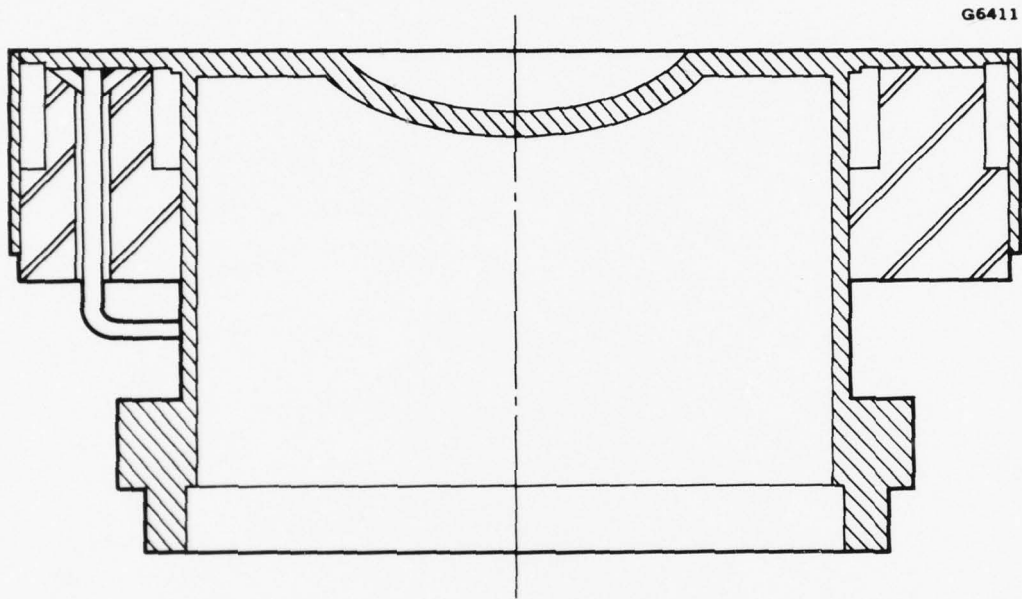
SANDWICH GRID ASSEMBLY AFTER FORMING AND
